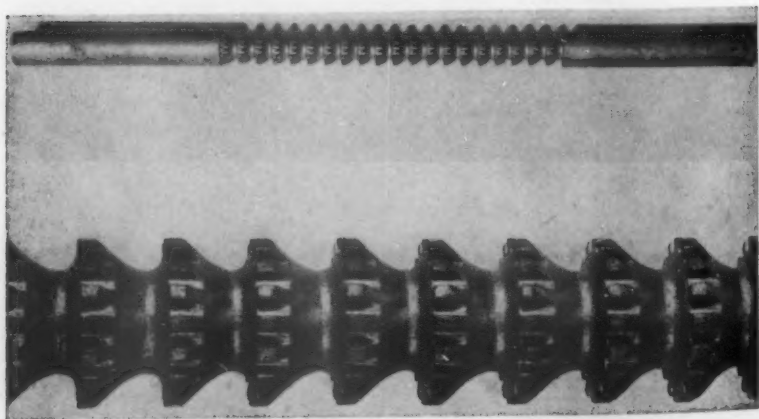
TOP—A SPLINE BROACH CASTING SPUN IN GREEN SAND. BOTTOM—ENLARGED SECTION SHOWING DETAILS.
